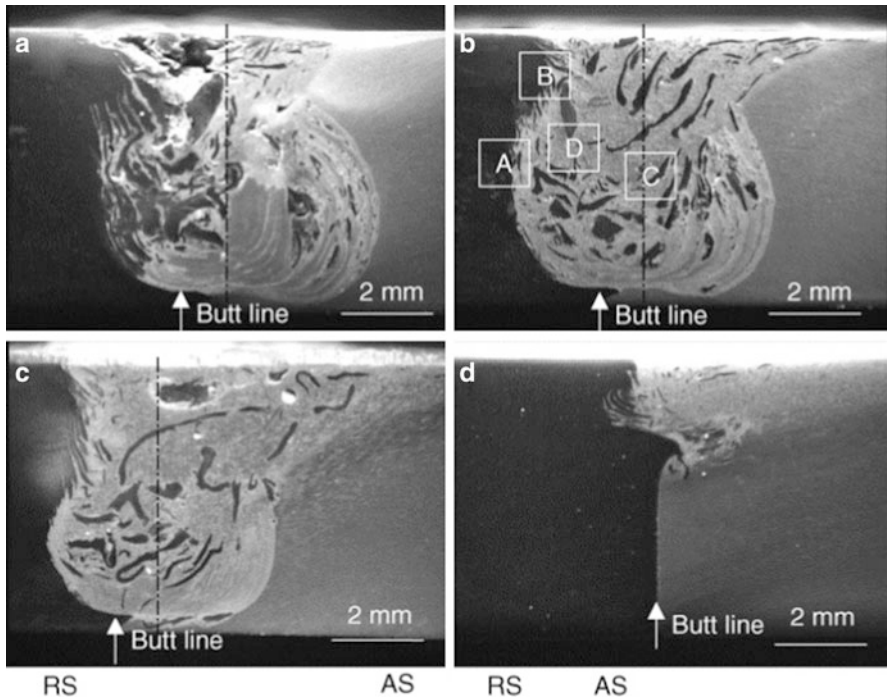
Macrostructure of Al/Steel weld at (a) 20 mm, (b) 45 mm, (c) 80 mm, and (d) 120 mm along longitudinal direction for the weld with +1 mm tool offset (Chen and Kovacevic 2004, reprinted with permission from Elsevier)
